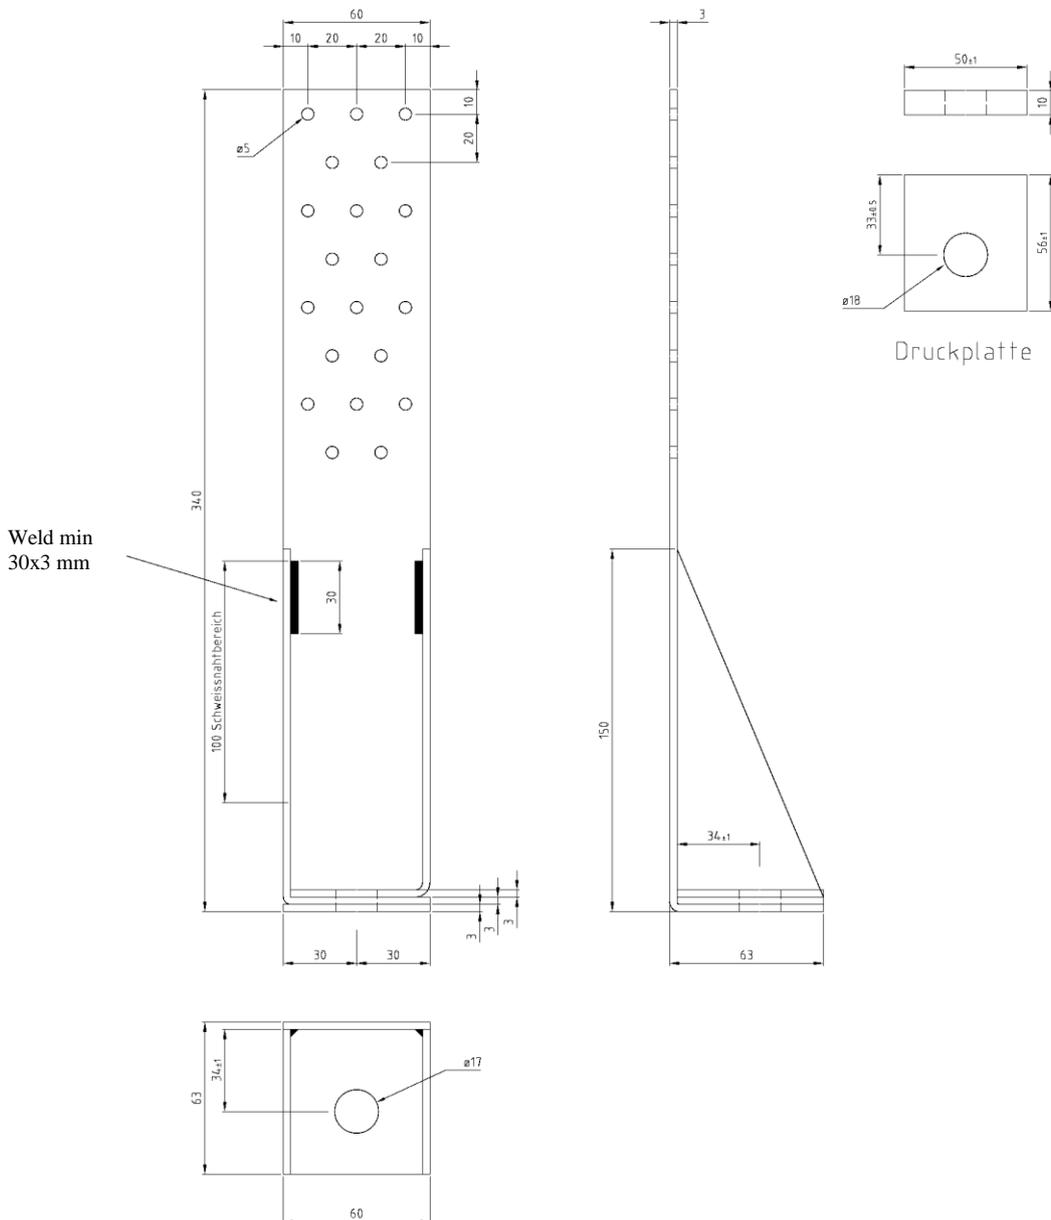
Dimensions of type GH HT16 60/340 (drawing with washer 56x50x10)
